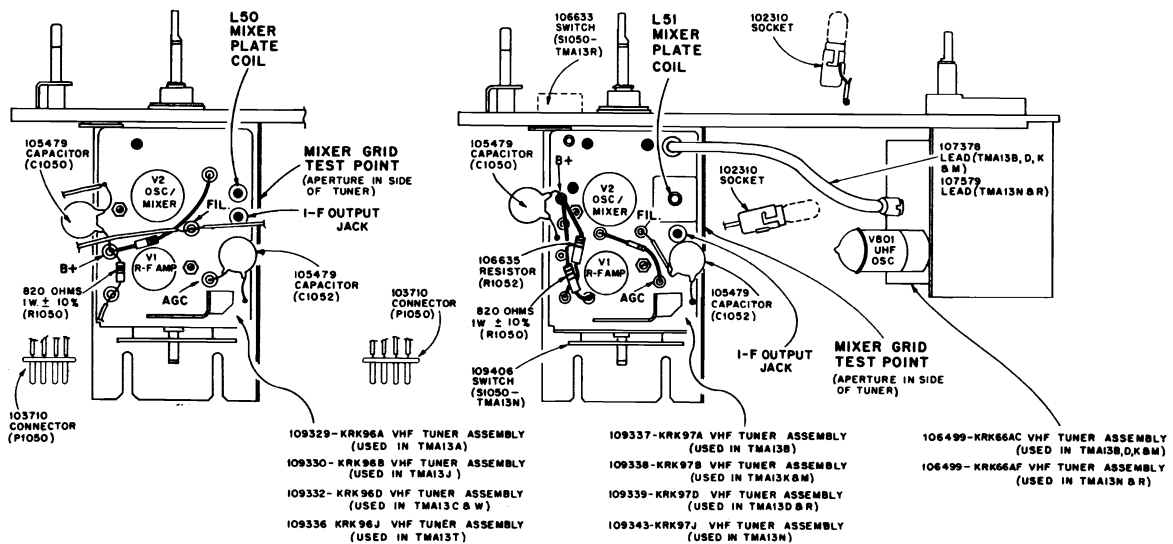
TMA13A, B, C, D, J, K, M, N, R, T & W Tuner Mounting Assembly Parts Identification
